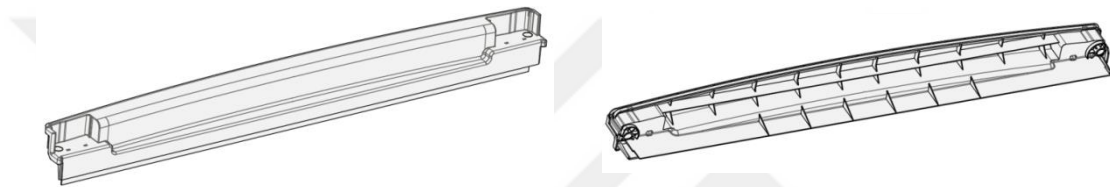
3D PART VIEW OF REFRIGERATOR DOOR CAP
